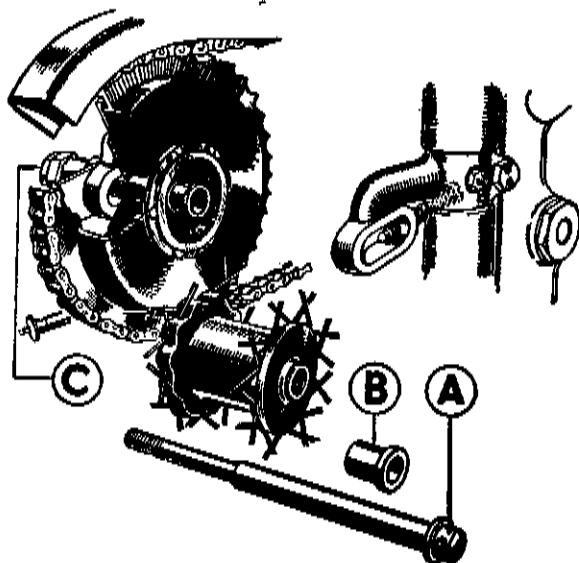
(c) Rear Wheel Removal (Spring Frame)
